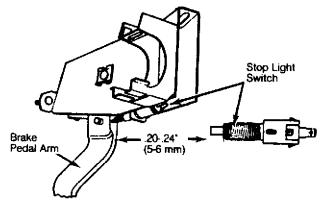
Adjusting Stoplight Switch Courtesy of Volkswagen United States, Inc.
